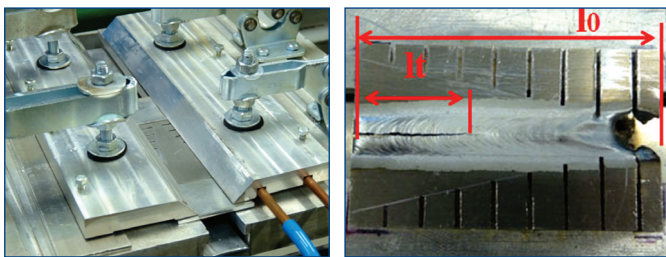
Welding jig (left), sample after GTAW welding (right)
